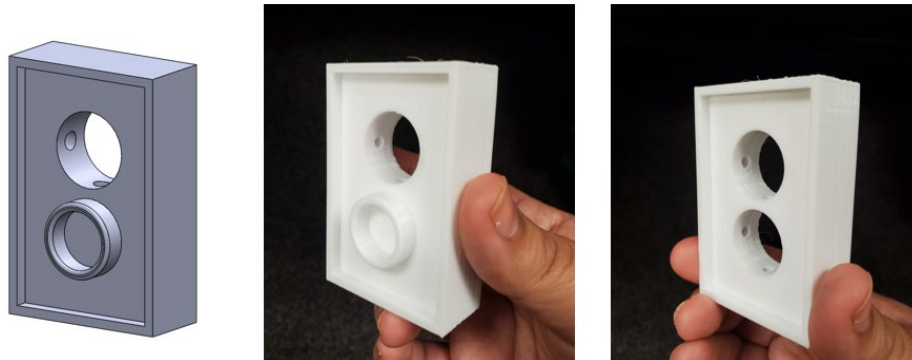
CAD vibration module design and rod end to fit the springs
